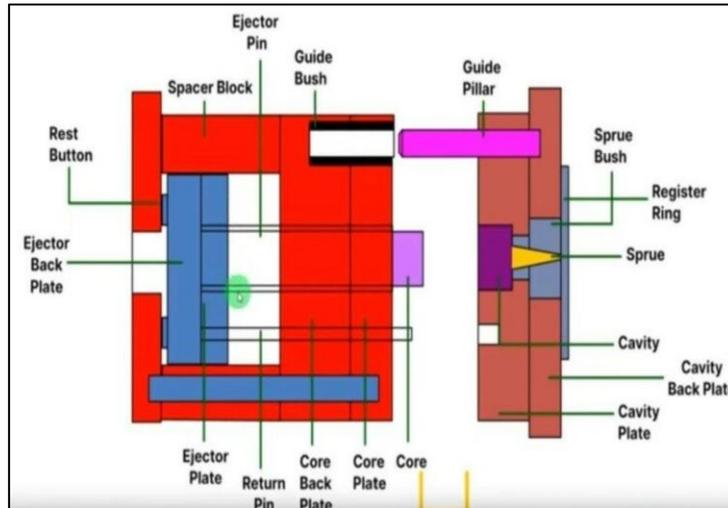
Mould components of a 2 plate mould (Achary, 2021)
